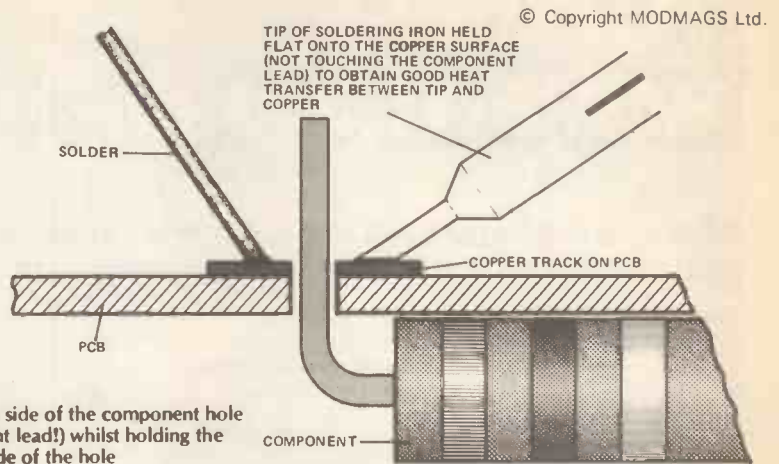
Heat one side of the component hole (not the component lead!) whilst holding the solder at the far side of the hole
